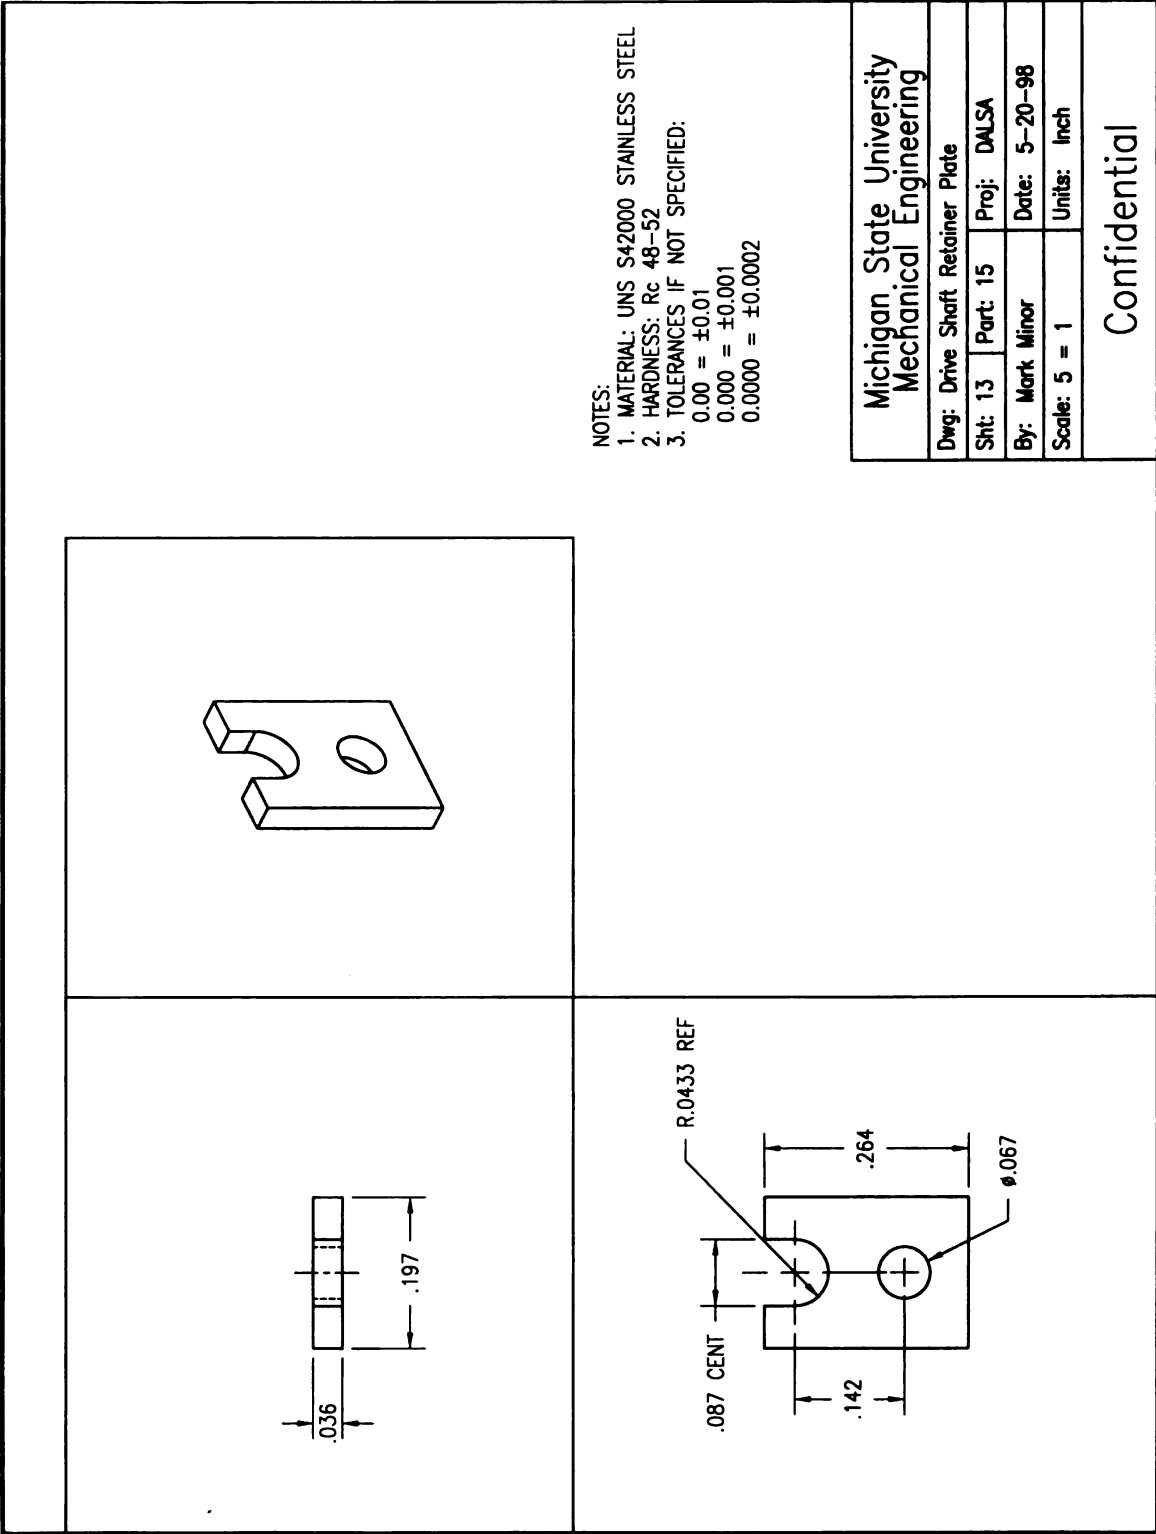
DALSA component: driveshaft retaining plate (sheet 13).
